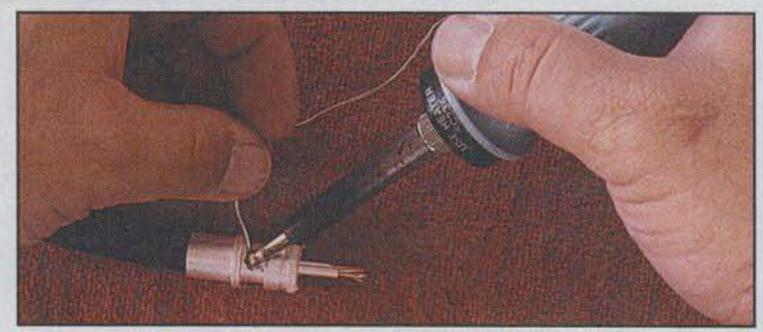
Screw the connector body onto the cable as far as it will go, and solder the shield to the body. When done properly, the molten solder will get sucked into the shield. Solder the center conductor to the center pin and trim the end. File the end smooth if necessary.
